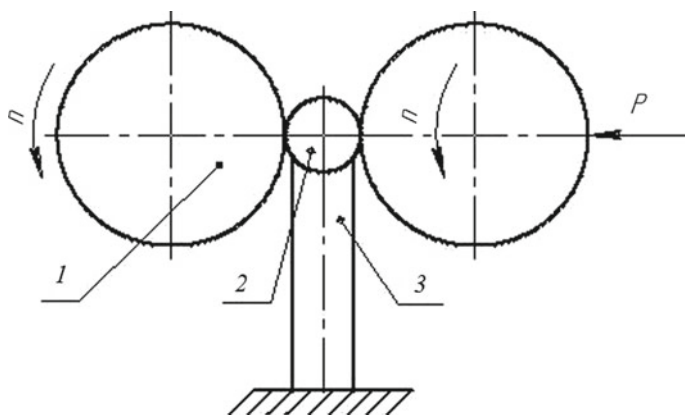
Rolling with rolls: 1–rolls; 2–workpiece; 3–stop
